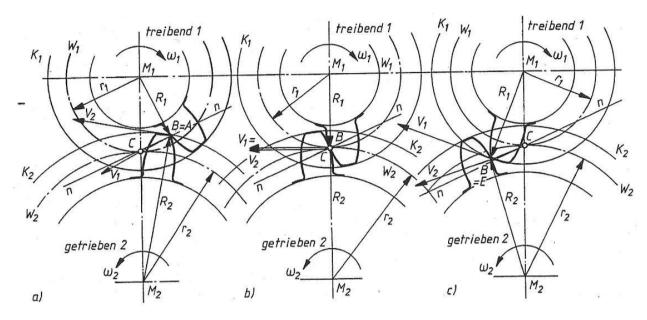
law of gearing and movement of the teeth of the gears. [30]
